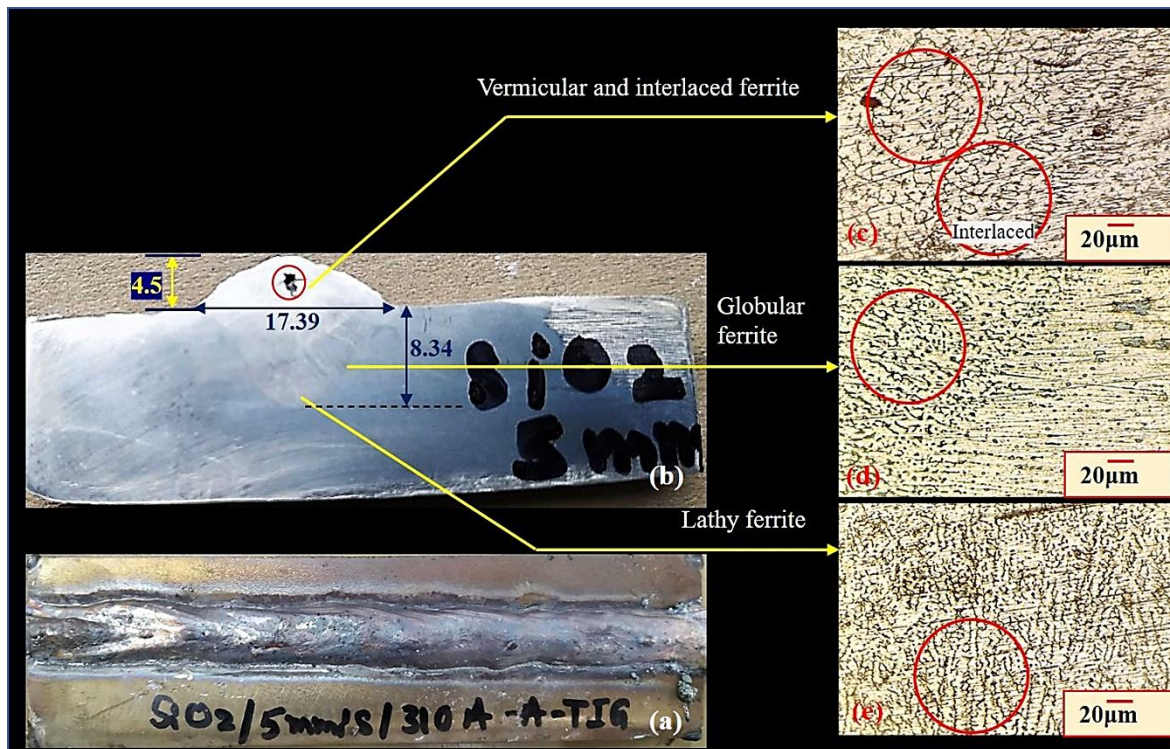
Photograph contains (a) Hybrid welded coupon using SiO_2 flux at 5 mm/s welding speed (b) Macrograph of the etched specimen (c), (d), and (e) showing the microstructure of different regions of weld bead
